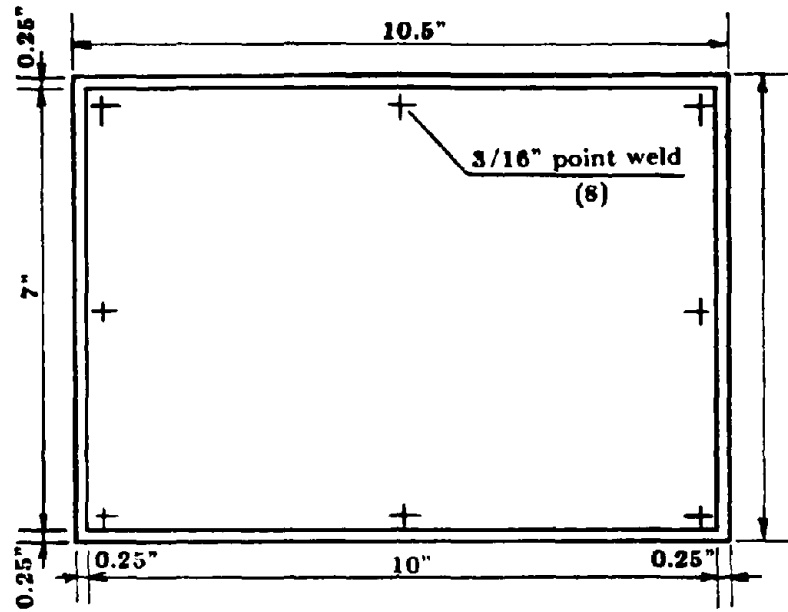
Teflon-stainless steel slider showing dimensions.
